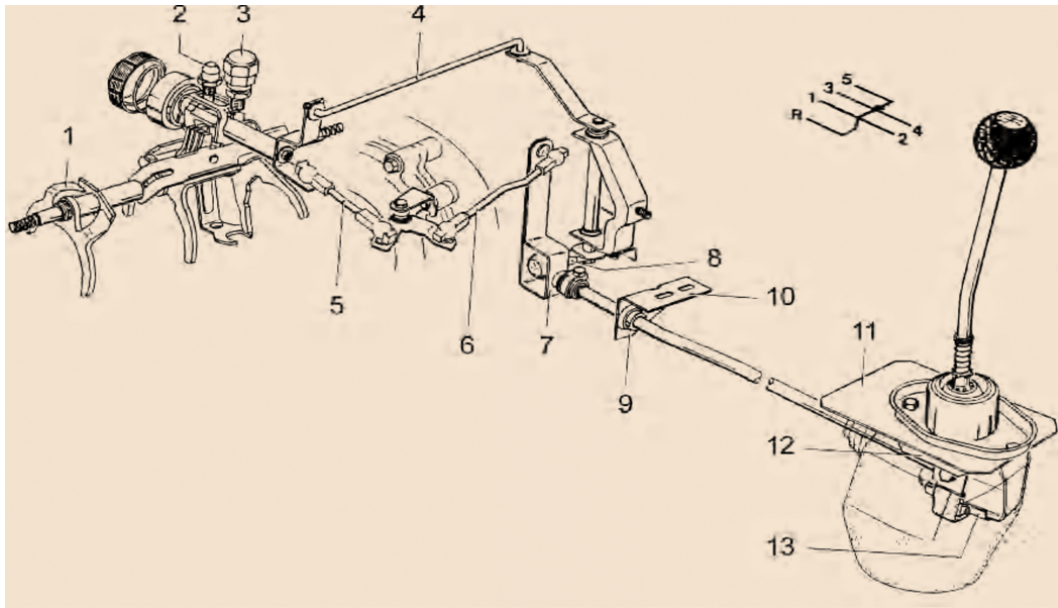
The schematic of external features for a gear shifting mechanism in a passenger car [8].
